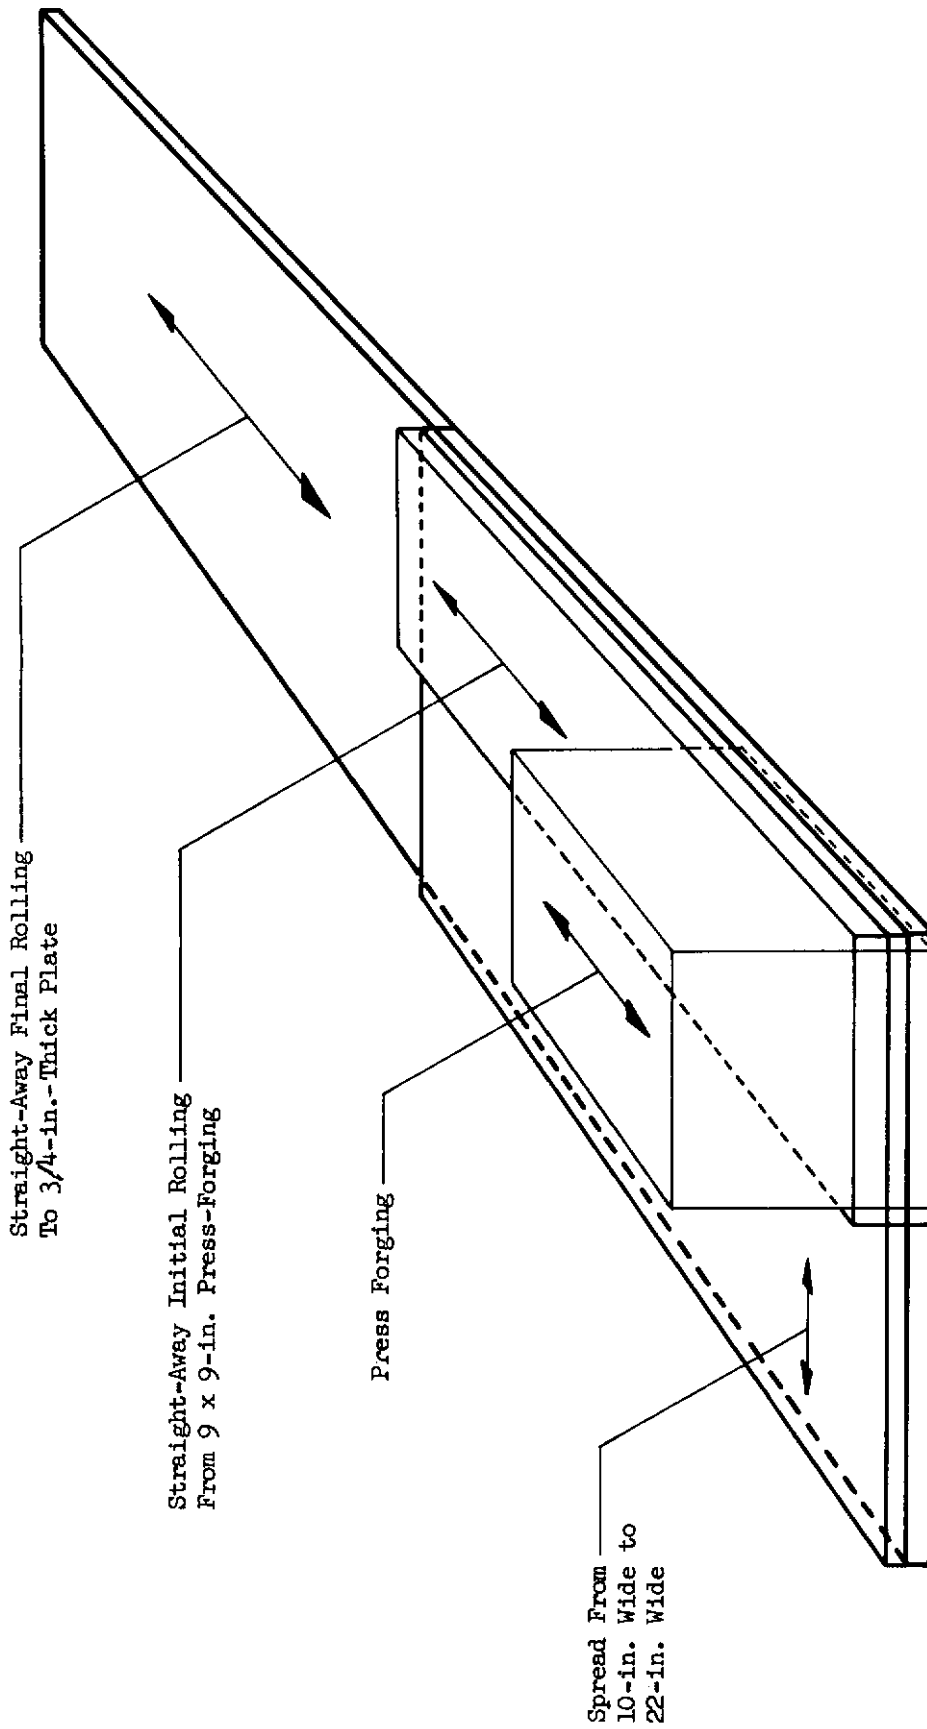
Schematic of Forging and Rolling Practice for Producing 3/4-In.-Thick Plate, Heat 24158
